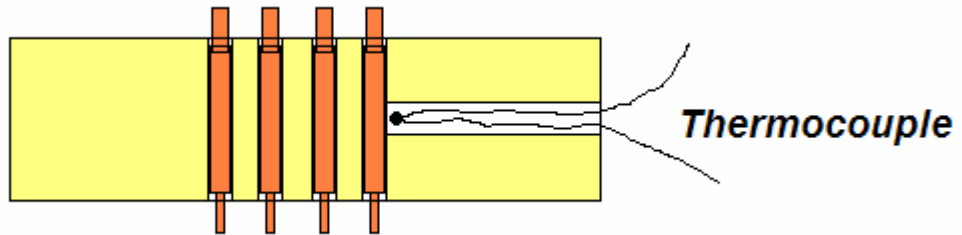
SBT 0.5mm socket mounting and fixturing example
